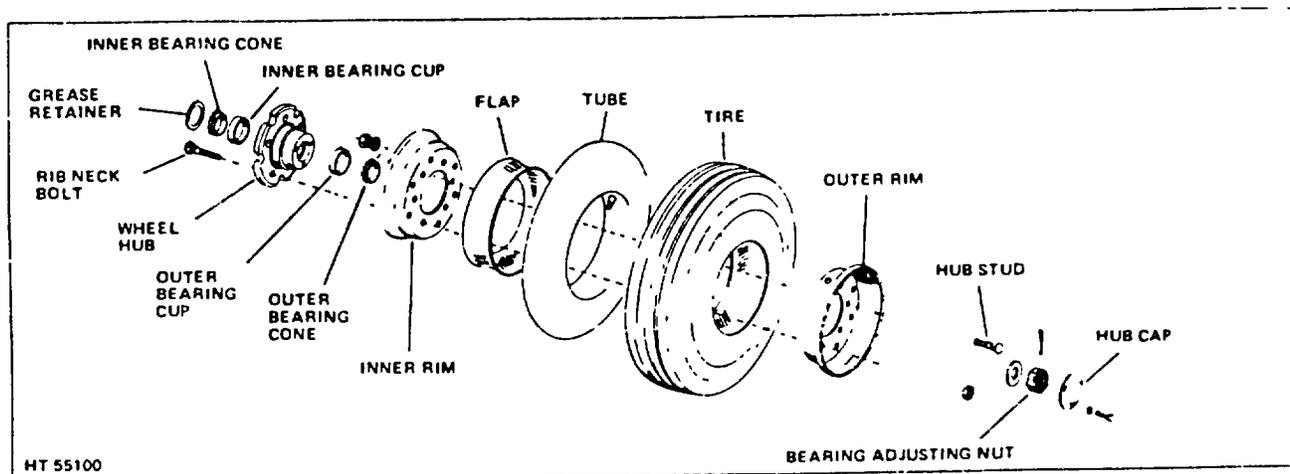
Steer Wheel Assembly (Pneumatic Tire)
